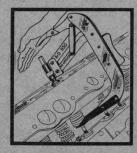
Raise operating handle. Place Compressor on motor with lower jaws under the lower spring retainer. Pushing operating handle down raises spring. After keepers are removed, raise operating handle to remove compressor. Proceed to next spring. Do not disturb plunger bar setting.
